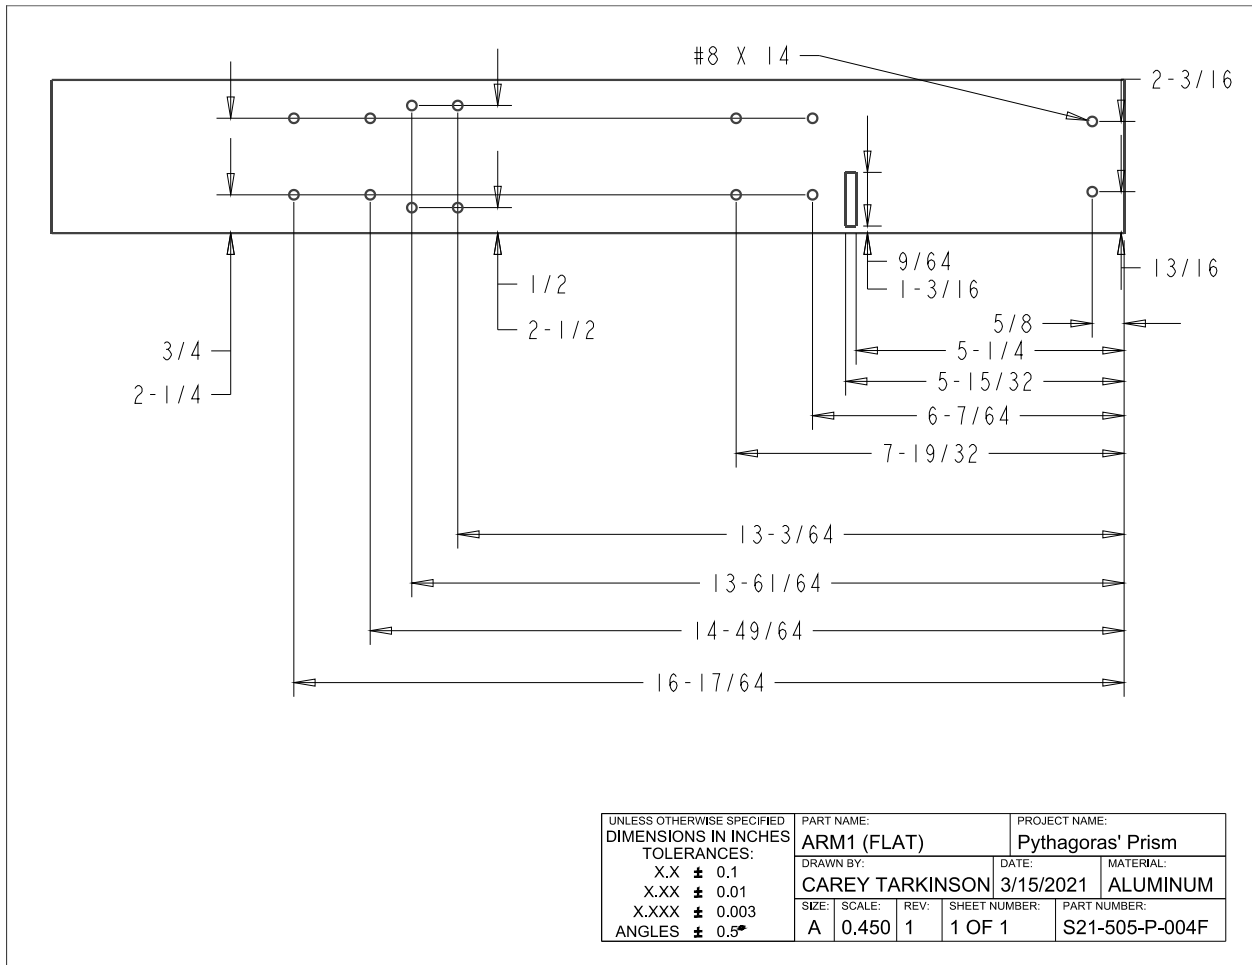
Engineering drawing of passive arm with dimensions for machining.
